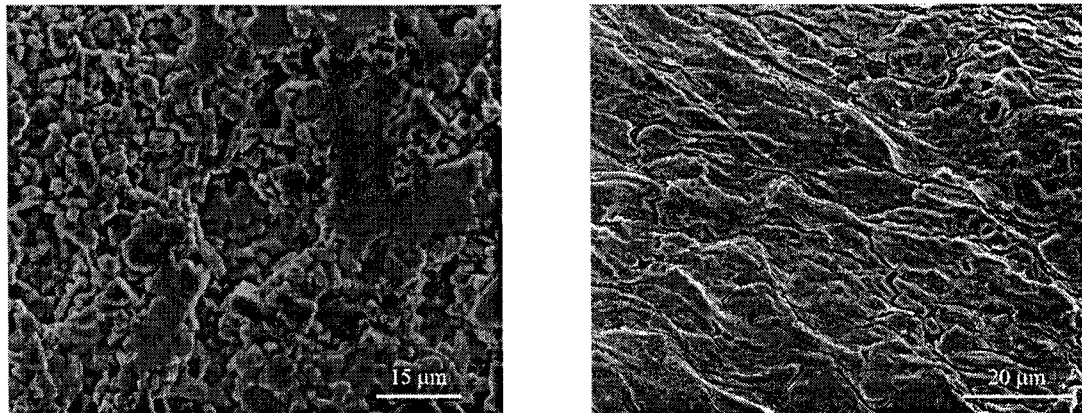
Galvanized coating on undeformed material and surface cracks for deep drawn continuously annealed material stripped of coating prior to drawing.
